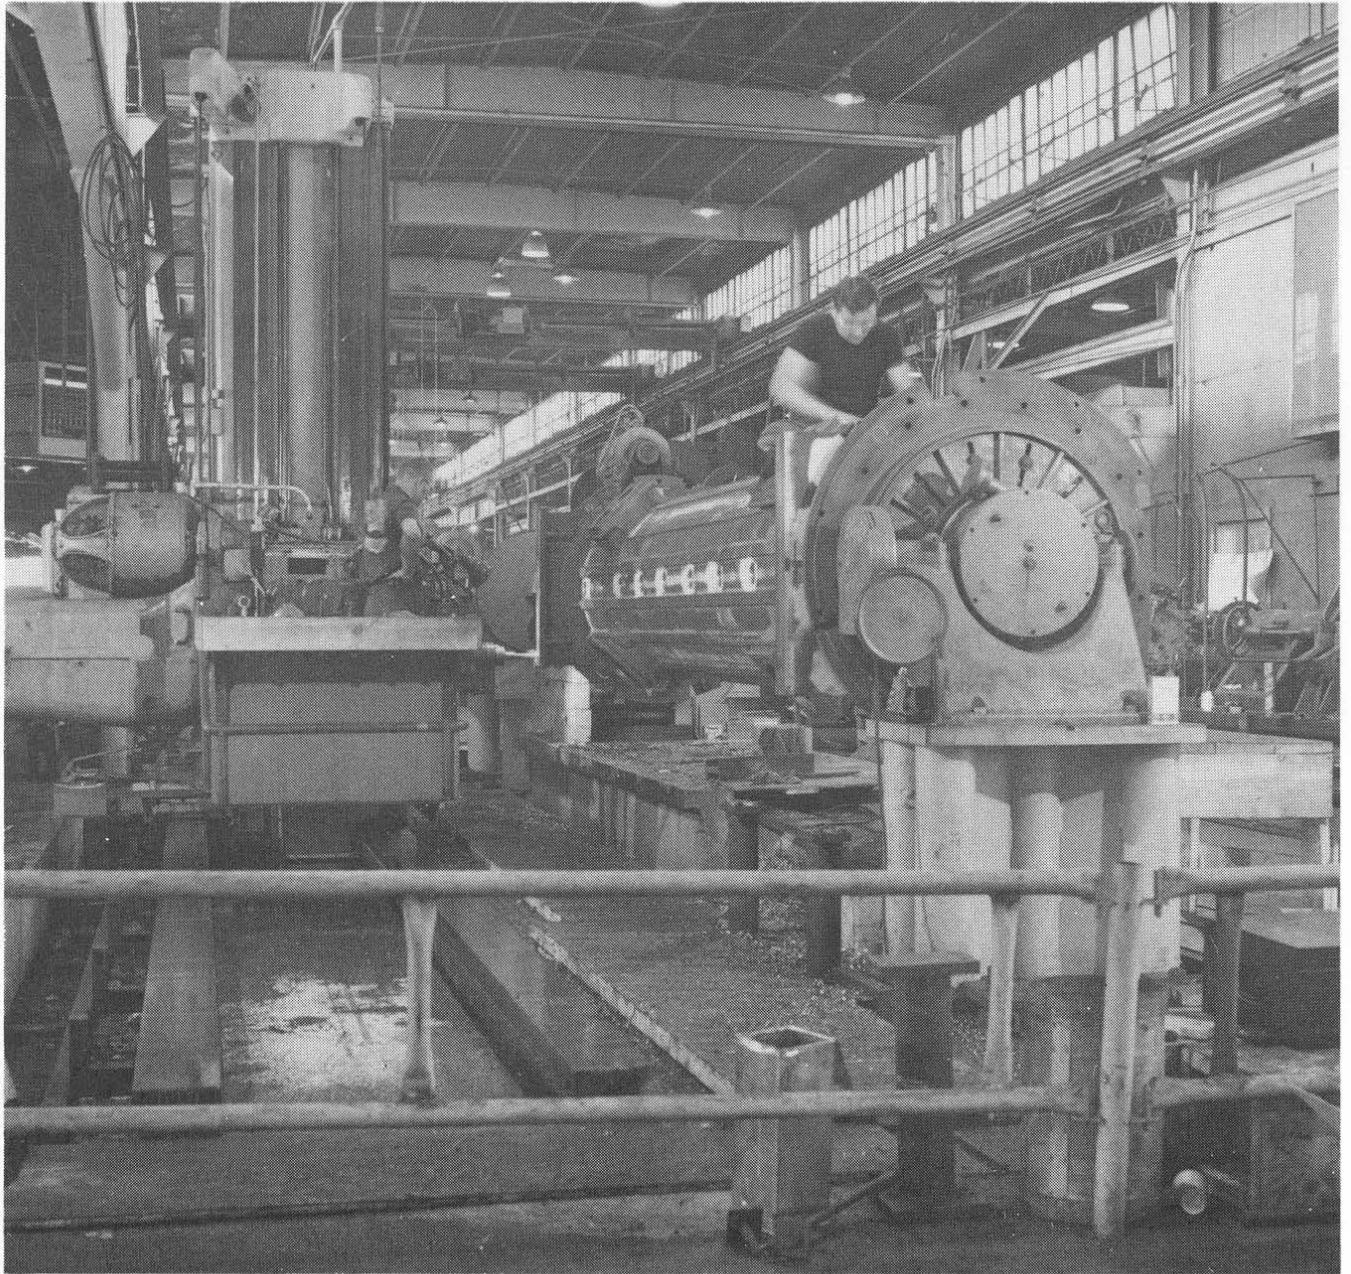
Finish machining in 6-in. horizontal milling machine.
